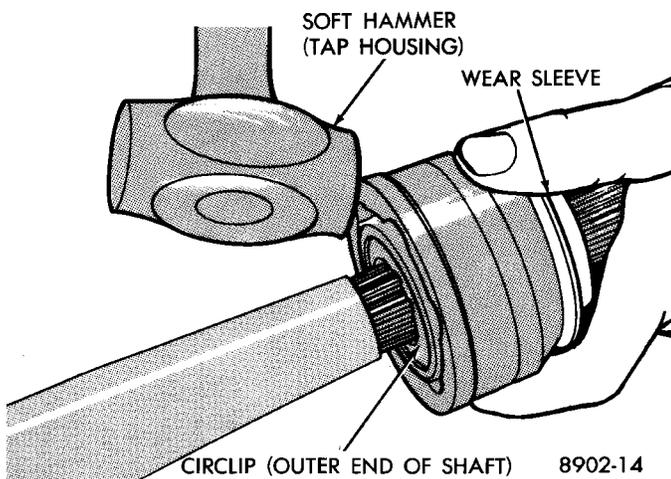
Outer C/V Joint Removal from Interconnecting Shaft
